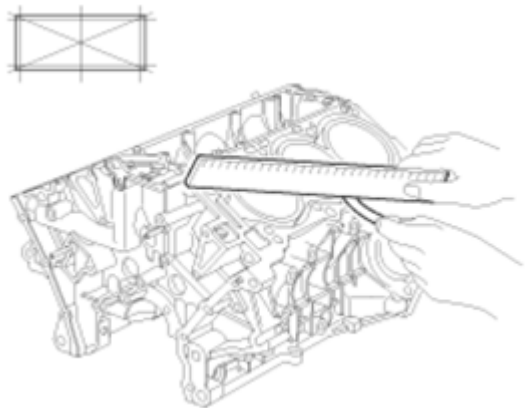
Inspecting Surface Of Cylinder Block For Flatness
